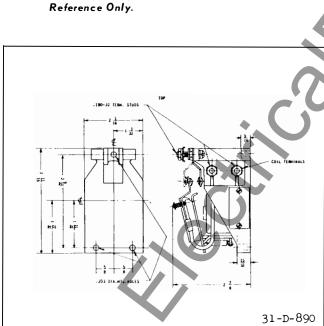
Outline and Drilling Plan for the Open Type SG Auxiliary Relay with Reversible Contacts. For Reference Only.
